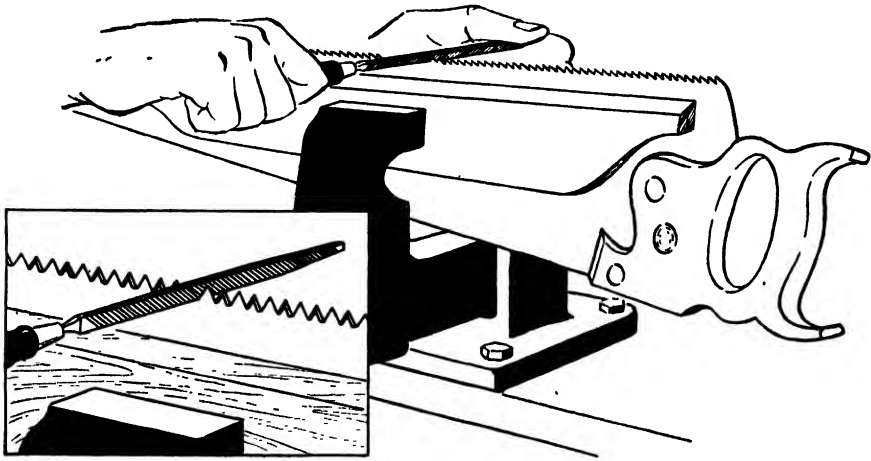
Filing a crosscut saw held in a homemade clamp and machinist's vise.
